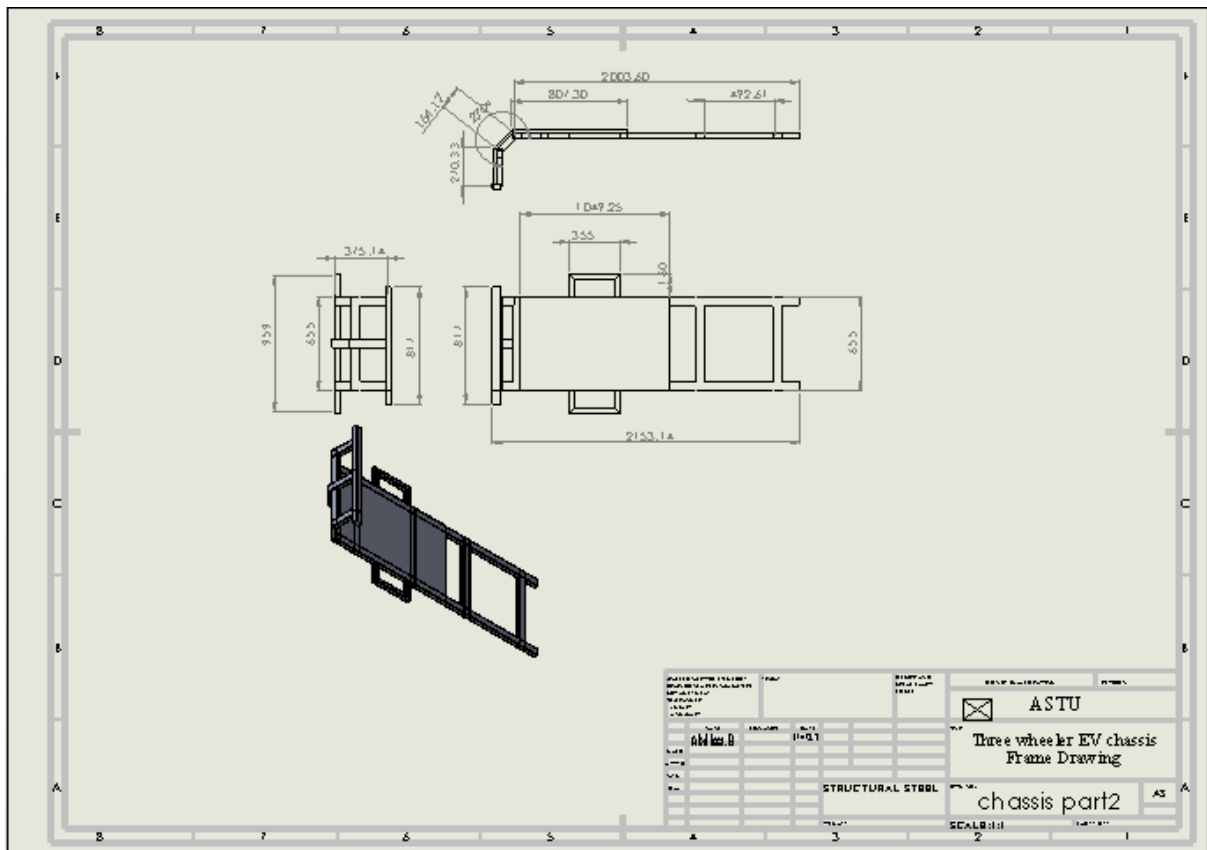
Detailed Drawing of three wheeler electric vehicle chassis
